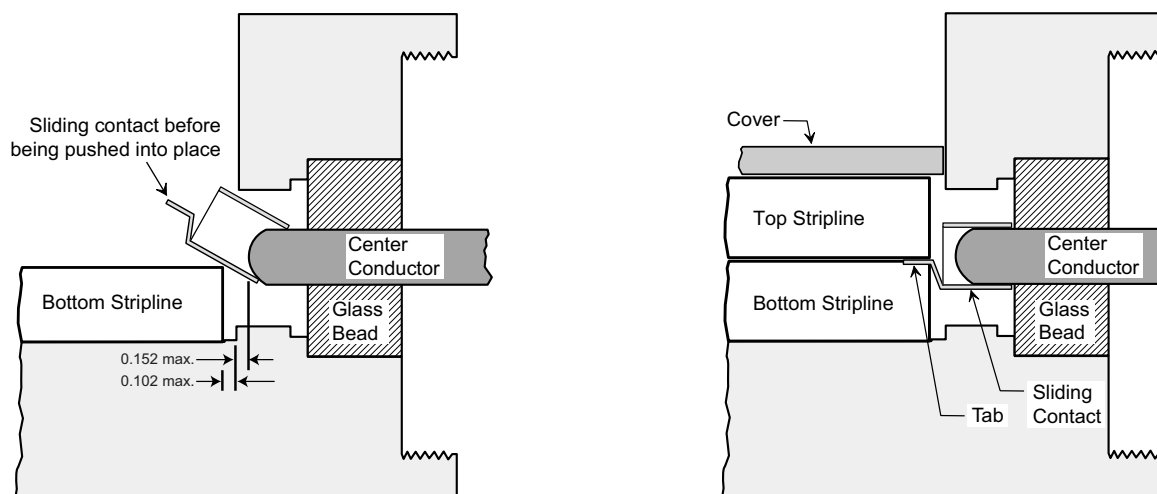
K110-2-R Sliding Contact Assembly, Method 1
